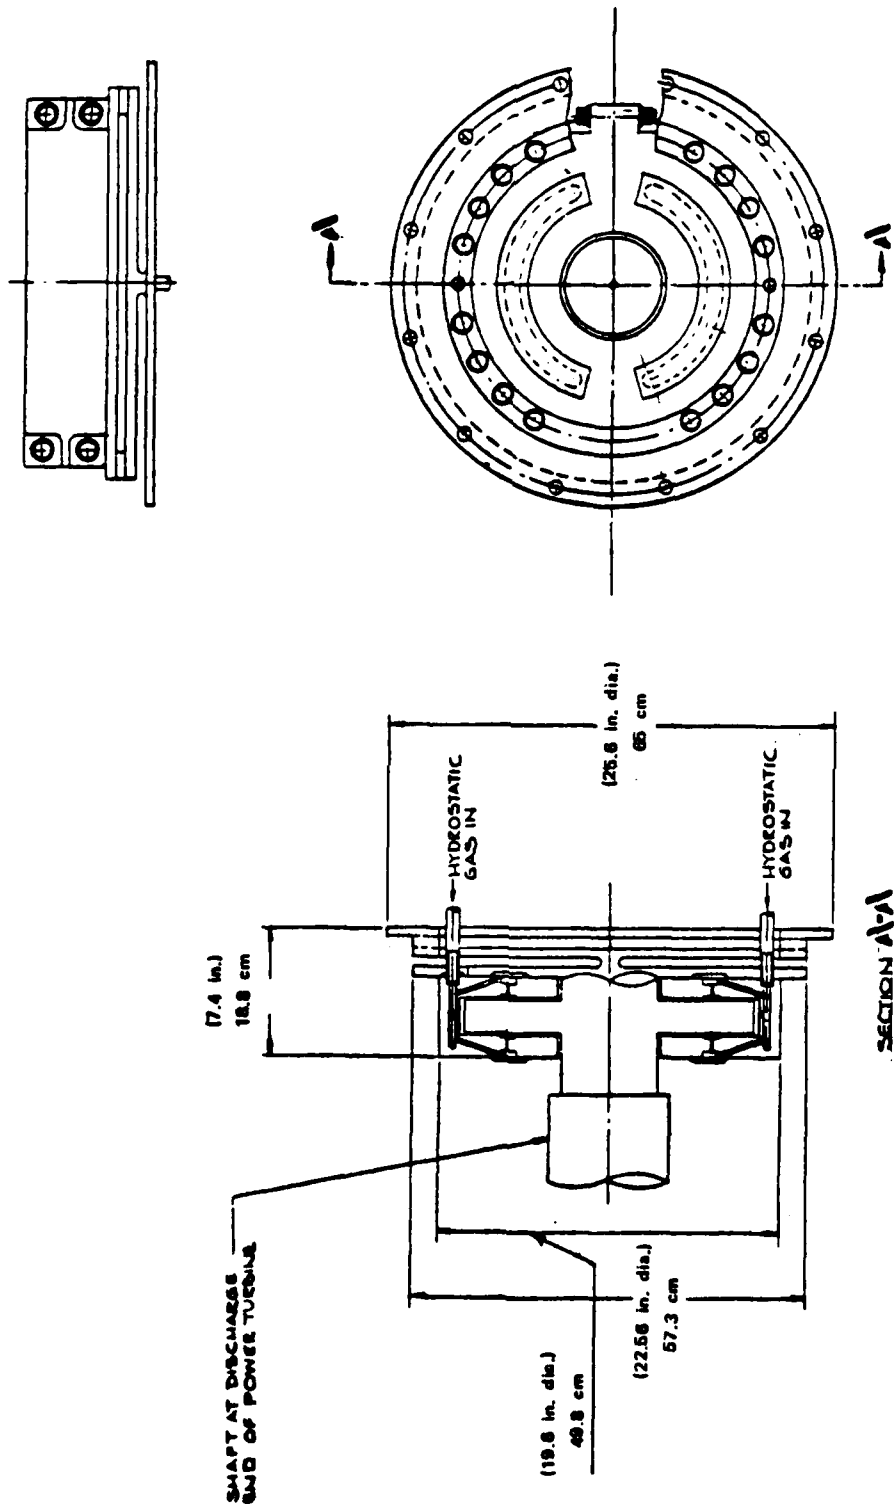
Hydrostatic Gas Thrust Bearing for Power Turbine
